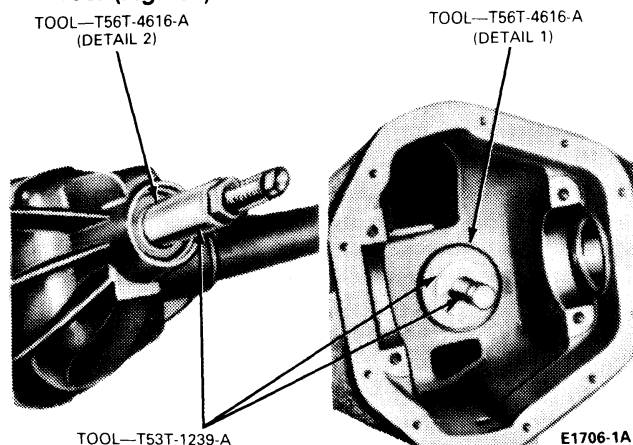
Installing Pinion Bearing Cup—Models 60 and 70
